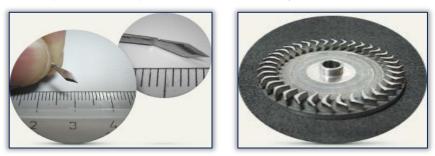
Examples of machined parts with ECM made from corrosive resistant steels [9]
